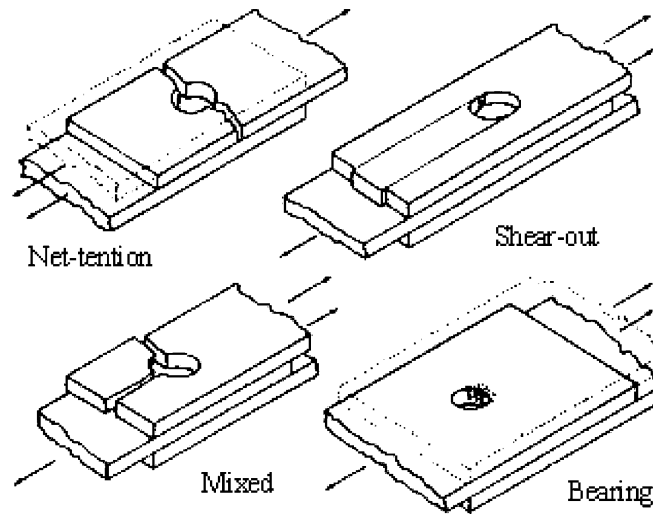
Typical failure modes in composite bolted joints: net-tension, shear-out, mixed or cleavage, and bearing failure. - Reproduced from [74]
